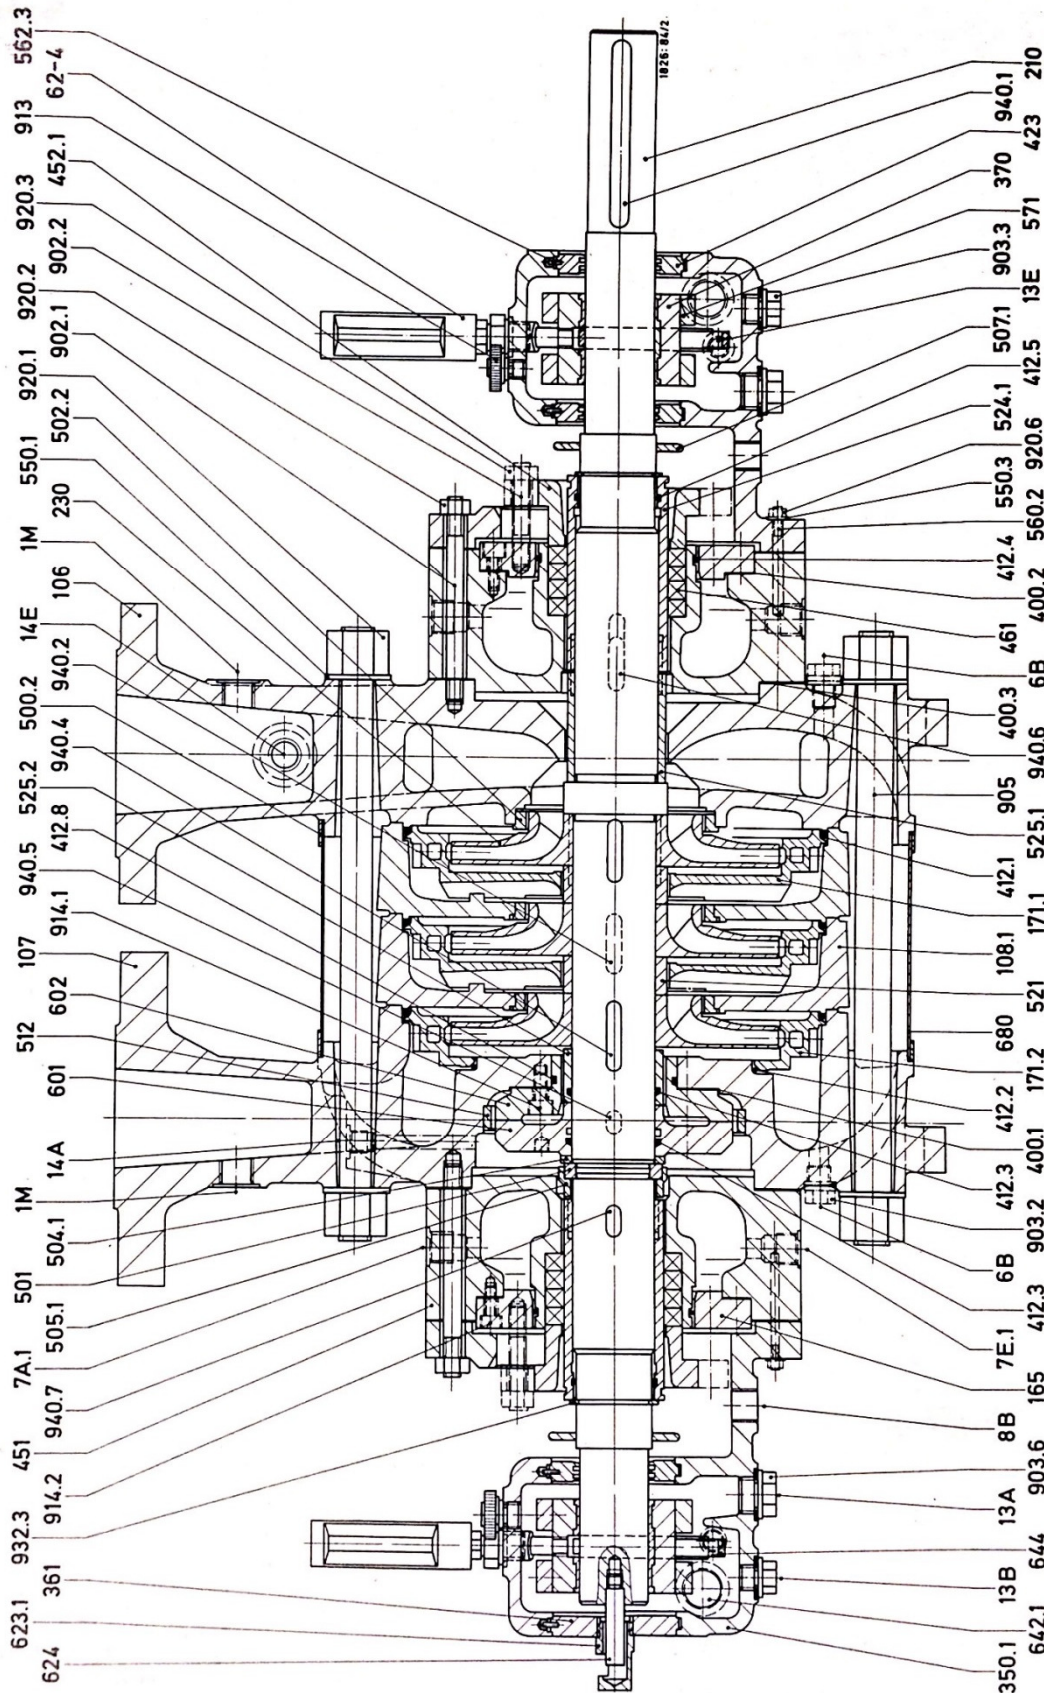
Standard execution sizes 65 up to 150 with plain bearings and gland packing
